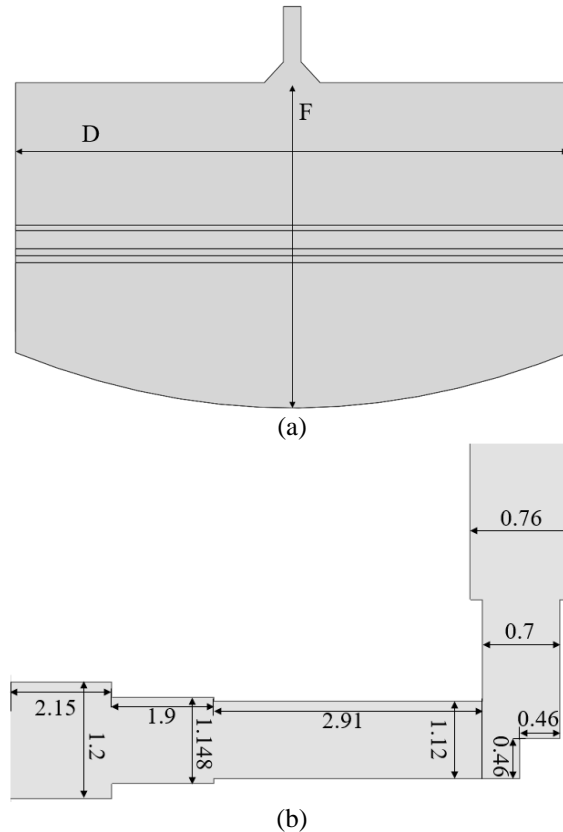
(a) Top view and (b) cross-sectional view of the linear source generator. All dimensions are given in millimeters.
